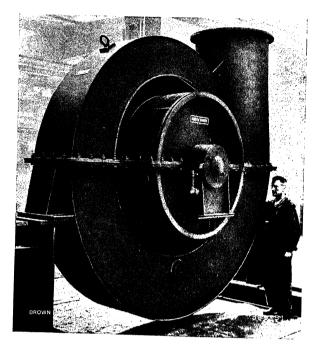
Welded spiral housing of a turbo-scavenging blower for M. S. "Saturnia".
